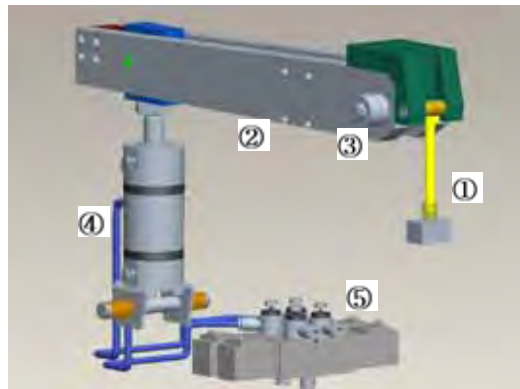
3D view of punching mechanism, punching parts, lever, lever pin, pneumatic cylinder, solenoid valve & speed controllers.
